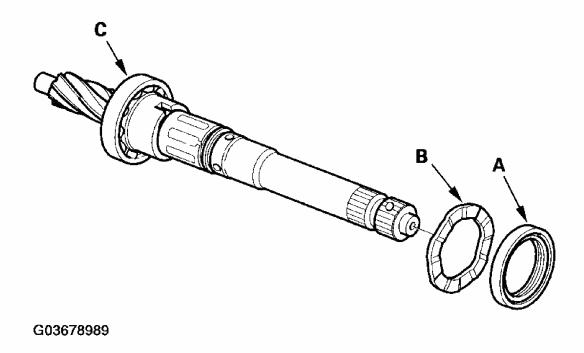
Removing Valve Oil Seal And Wave Washer From Pinion Shaft Courtesy of AMERICAN HONDA MOTOR CO., INC.
